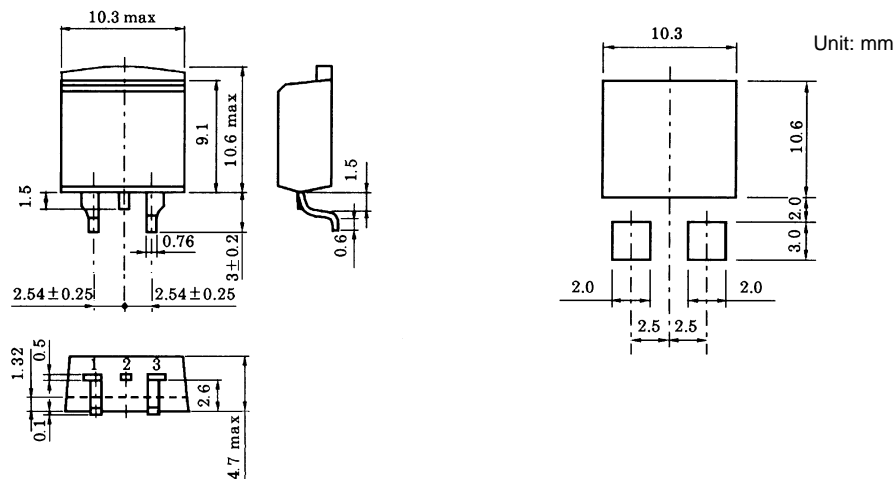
Minimum Pad Dimensions for a TO-220SM Package
